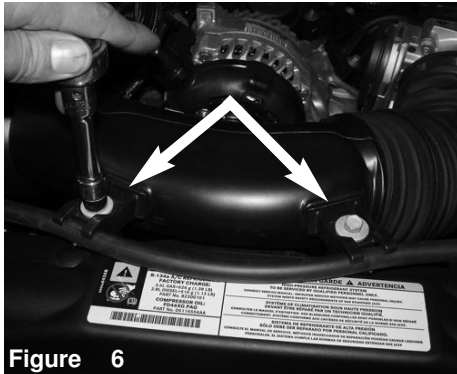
Loosen the 2 bolts holding in the stock intake tube using 10mm socket and ratchet.
